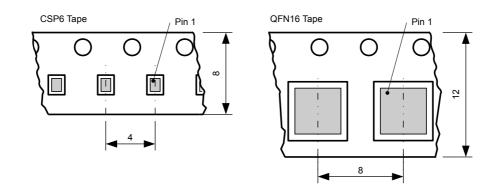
CSP10 and QFN16 Tape Dimension. Parts are placed with solder pads on bottom side
